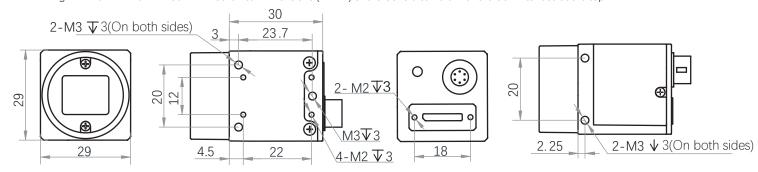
29 mm×29 mm×30 mm Mechanical Dimensions (in mm) of the USB3.0 camera with 4 sides for flexible mounting.
